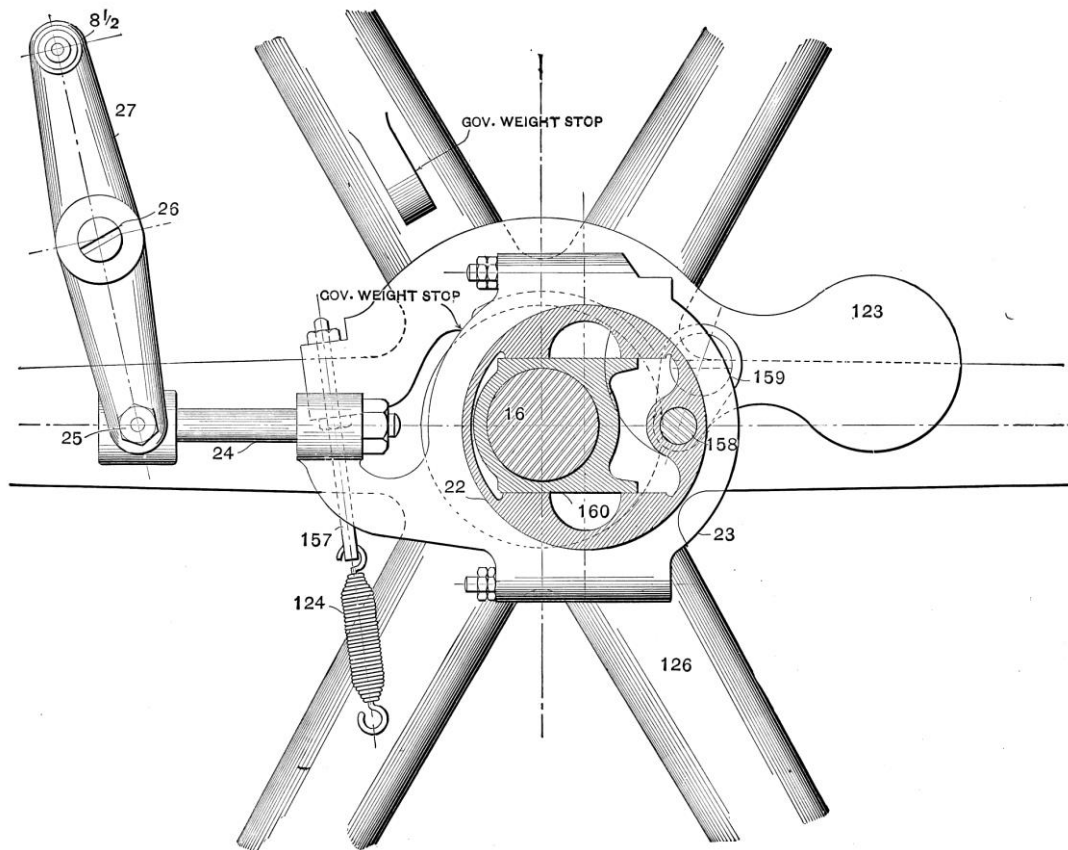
Assembled View of Governor of the Mietz & Weiss Oil Engine.
